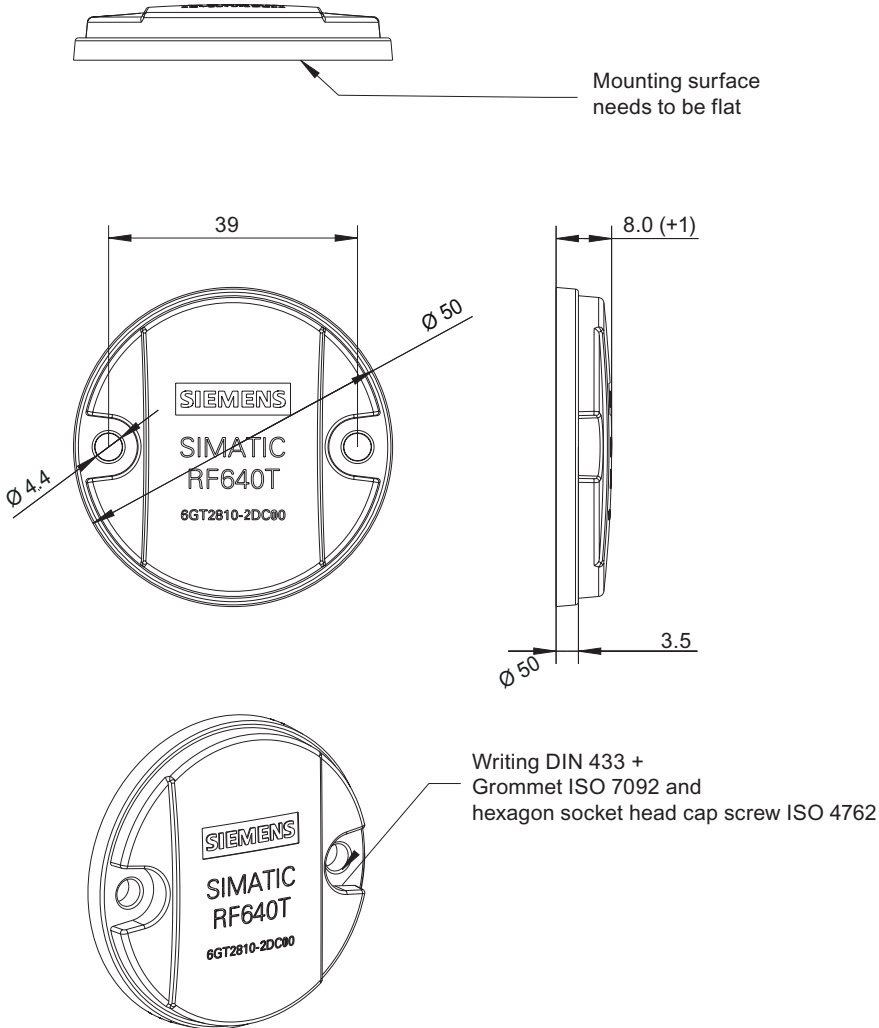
SIMATIC RF640T Gen 2 UHF Tool Tag Version 1
